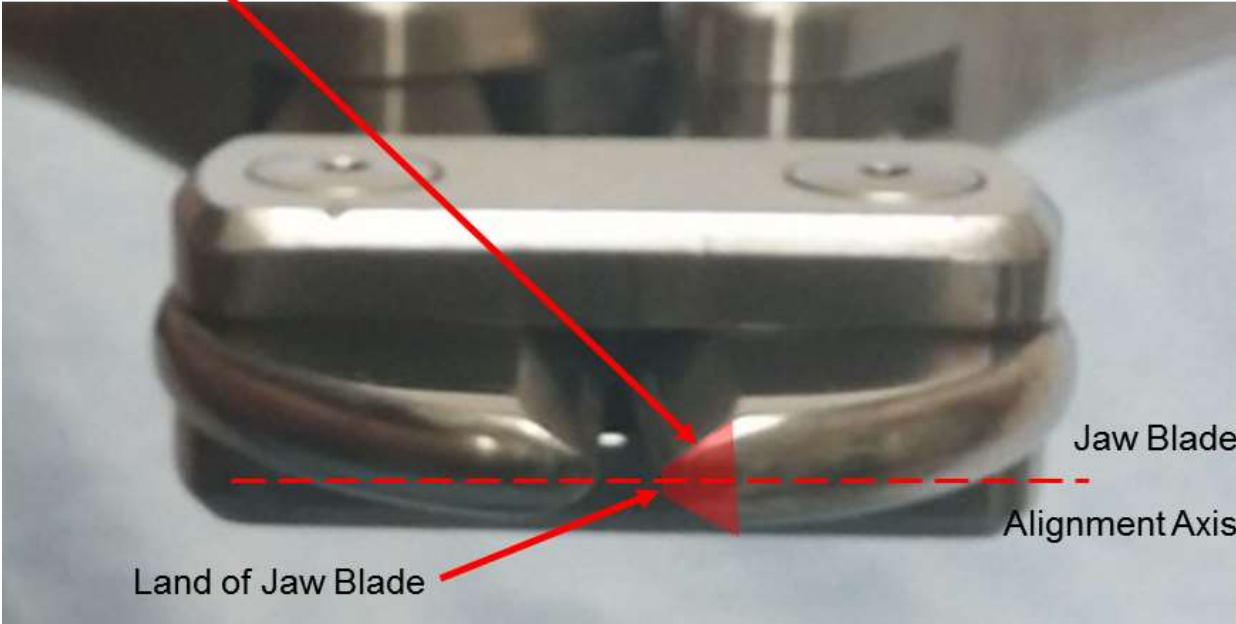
Cutting jaw geometry of in-situ rod cutters.
